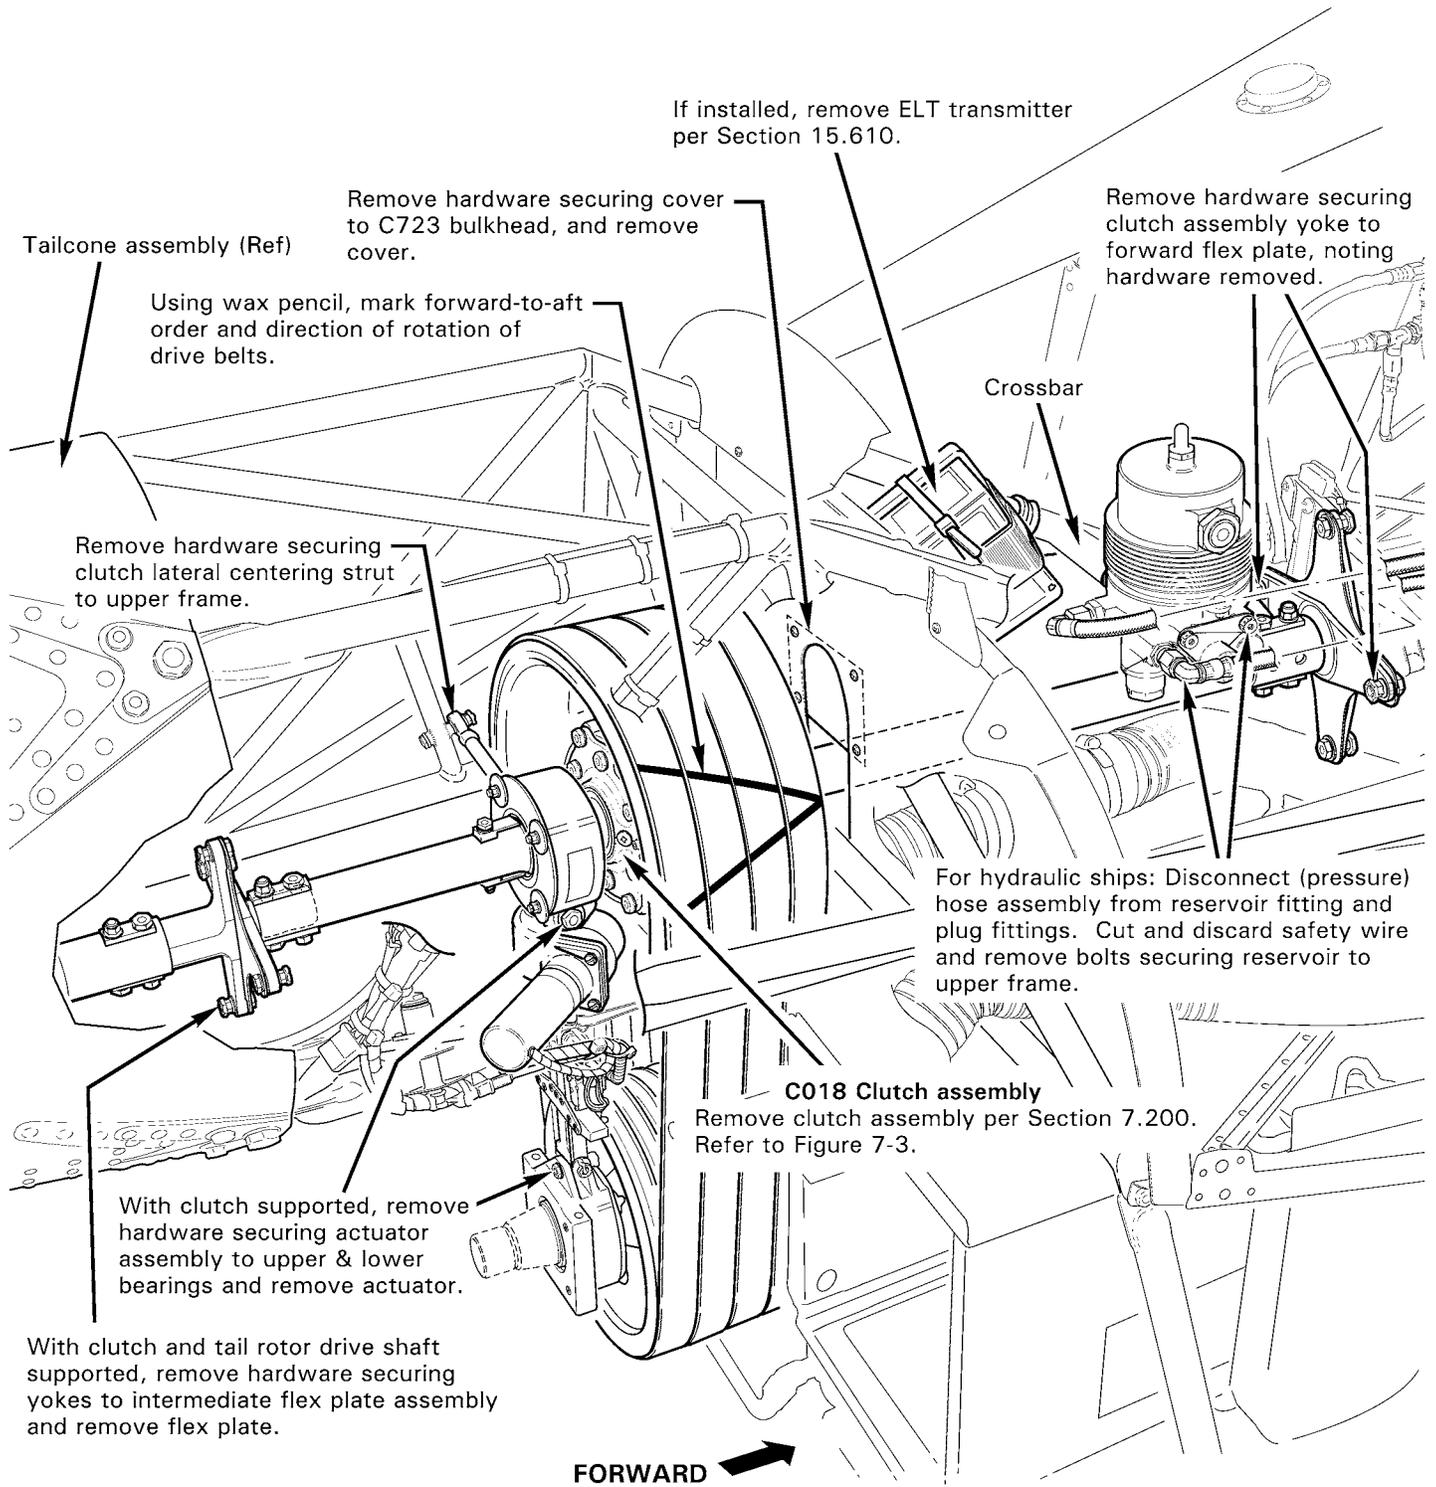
C CLUTCH ASSEMBLY REMOVAL
